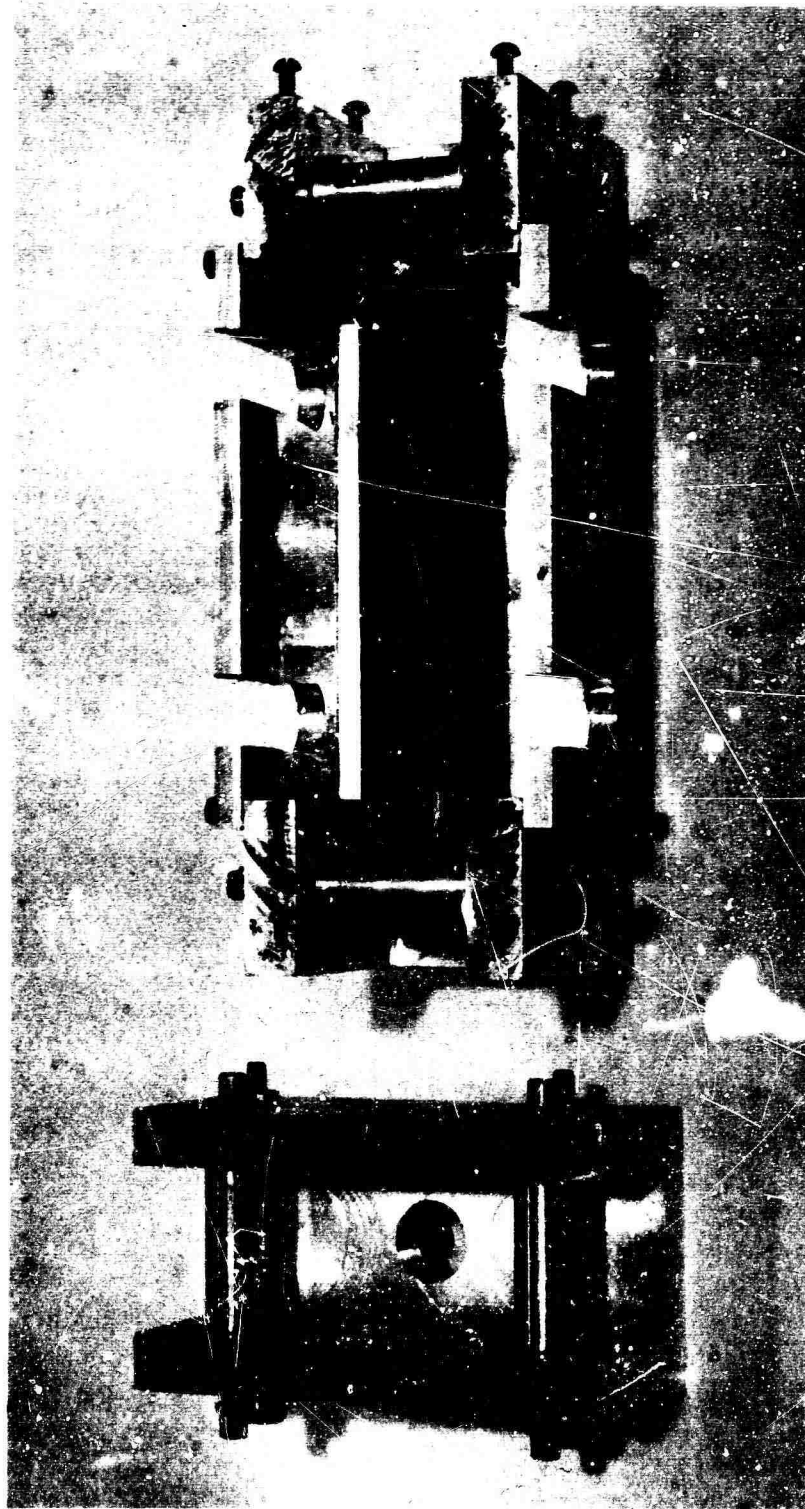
BENDING FIXTURE FOR FATIGUE OF 181/S901 GLASS CLOTH
